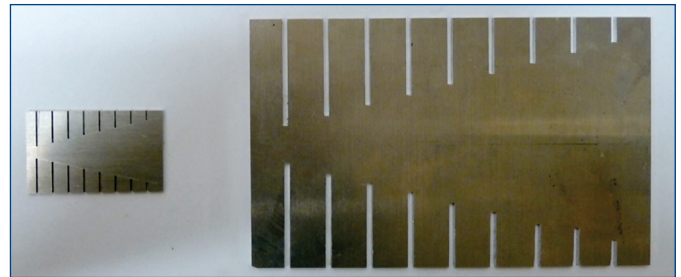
Comparison of fabricated samples used for Houldcroft test, left side GTAW sample, right side GMAW sample
